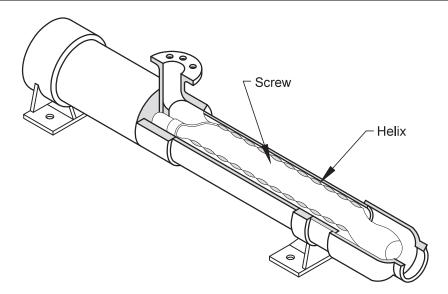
Single-screw (progressive cavity) rotary pump.
